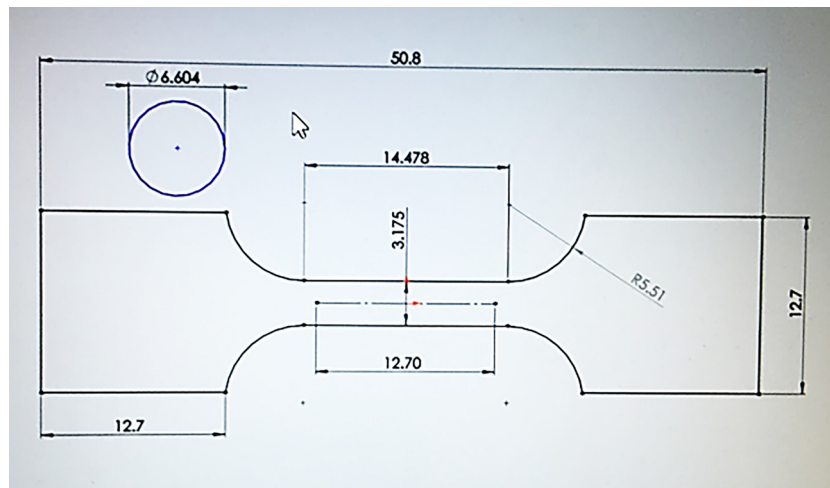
Dog Bone dimensions used to produce LPBF samples and TM samples, with all dimensions in millimeters. Dimensions are scaled down from ASTM E-8 standards [34].
